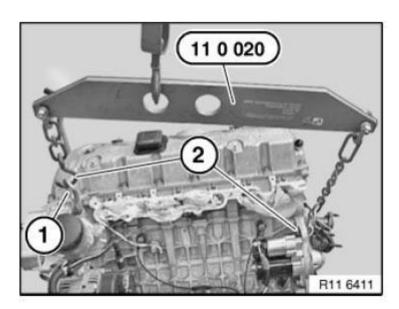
Identifying Towing Hook And Mounting Eyelets And Special Tool (11 0 020) Courtesy of BMW OF NORTH AMERICA, INC.
